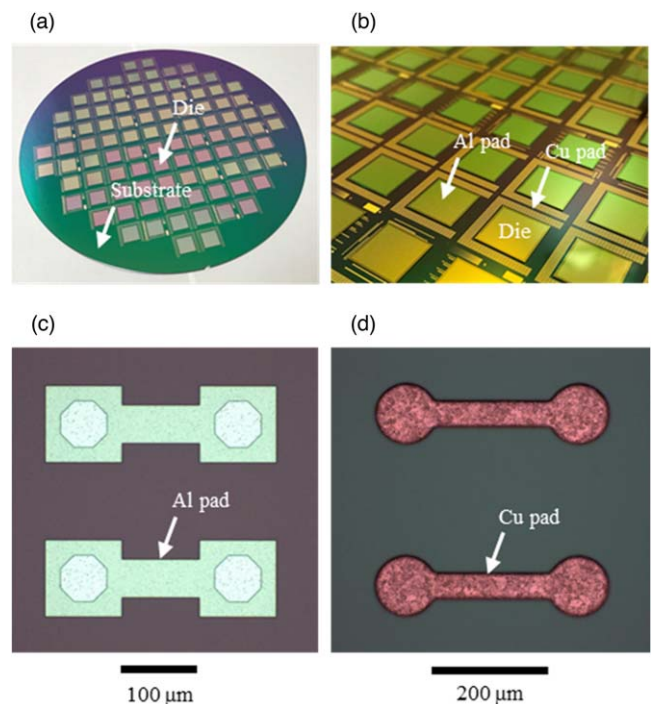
(Color online) Photograph of die mounting. (a) 8 inch Si wafer with 72 dies mounted. (b) Top view after mounting. (c) Al bond pad on the die. (d) Cu pad on the substrate.
